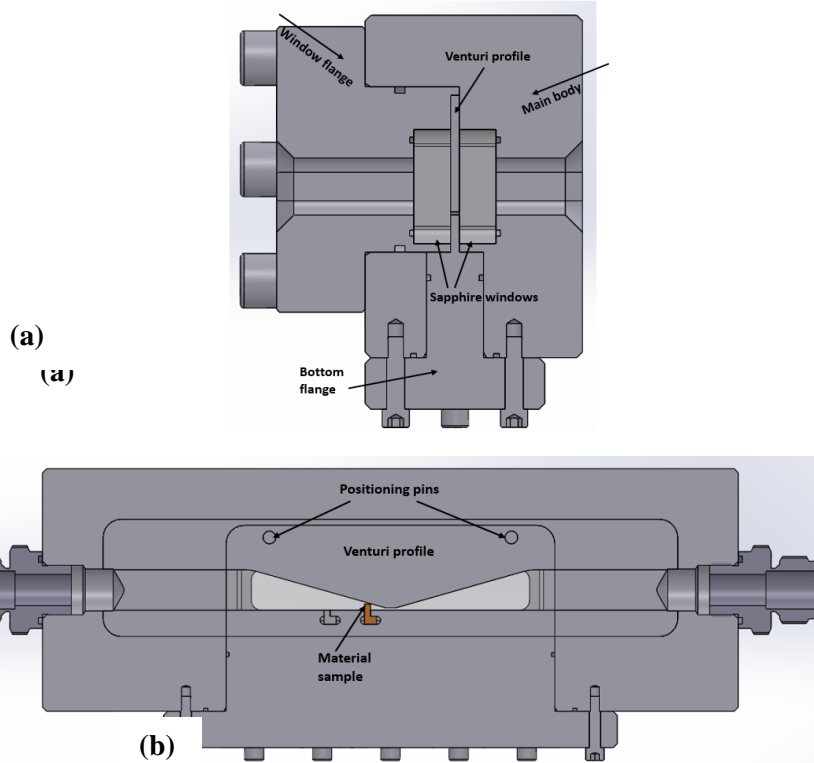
CAD model representing (a) Cross-sectional view of the internal details of the assembly process, and (b) Cross-sectional view of the converging-diverging profile along with the positioning pins and the erosion tests material sample.
